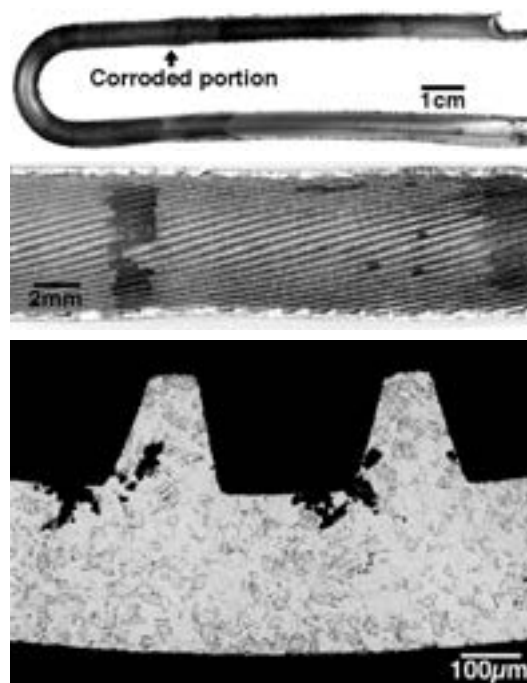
Inner surfaces (upper, middle) and a cross section (bottom) of a U-bended tube tested with self-evaporating oil.
